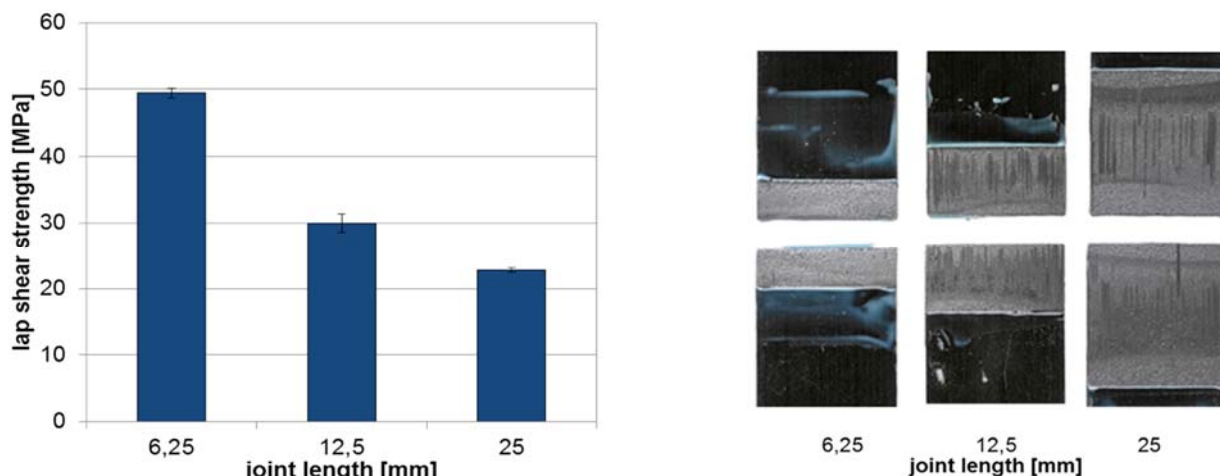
Lap shear strength and fracture surfaces of APPJ-treated single lap shear specimens with various joint length.
